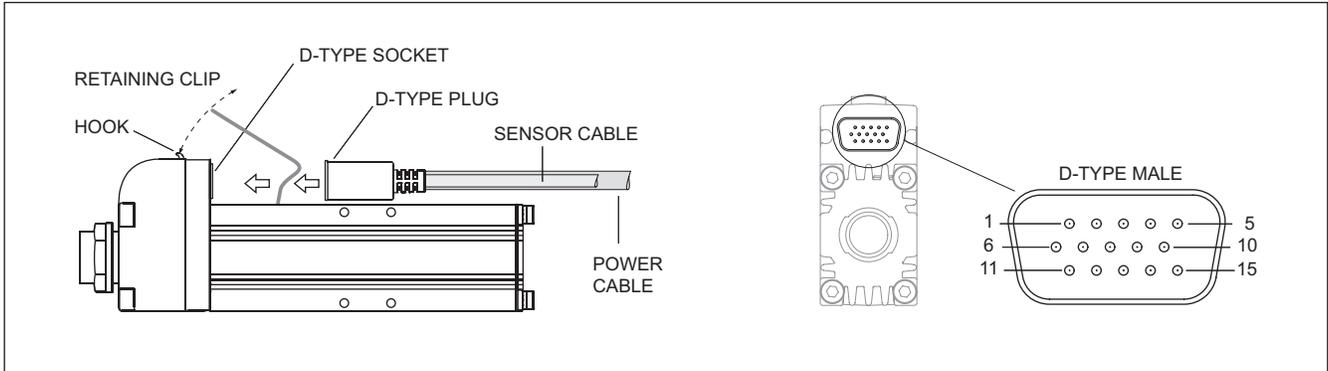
Shows connecting the cable assembly to the forcer and connector details
